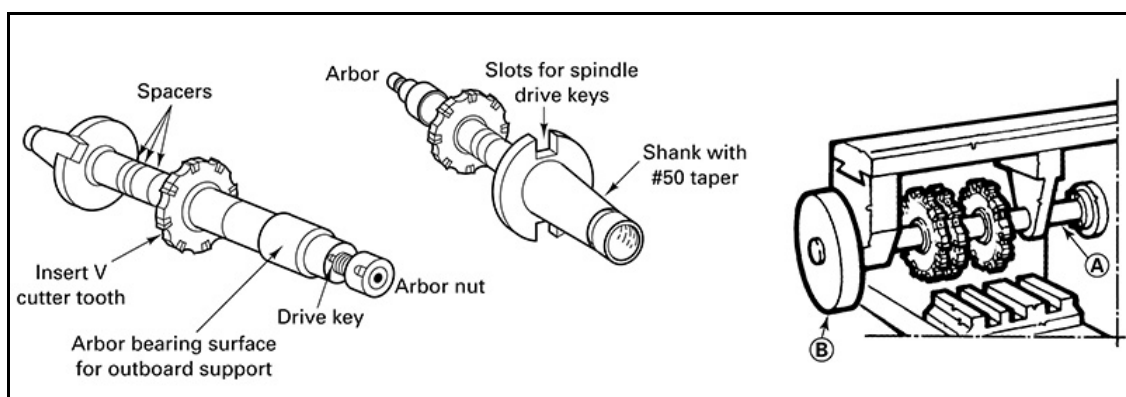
FIGURE Arbor (two views) used on a horizontal-spindle milling machine on left. On right, a gangmilling setup showing three side-milling cutters mounted on an arbor (A) with an outboard flywheel (B).
